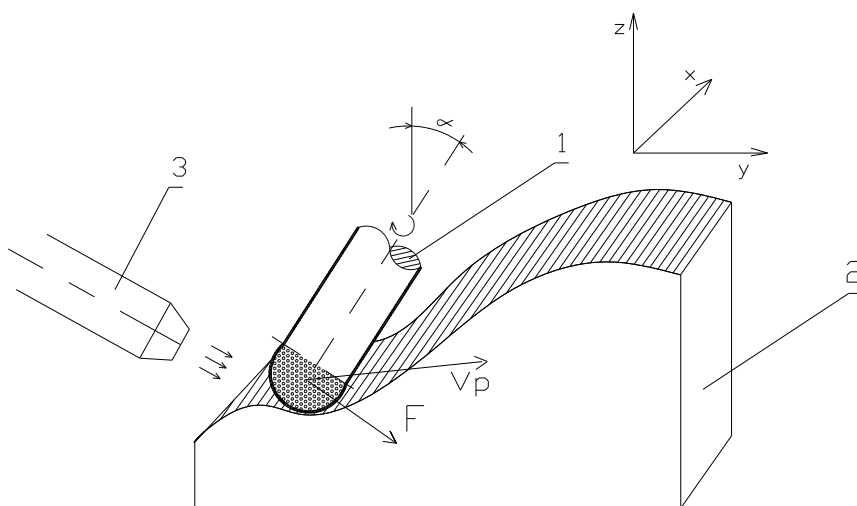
Scheme of machining area in electrochemical grinding process; v_p - grinder feed rate, ω - grinder rotational speed, PO - workpiece, ER - electrode tool (grinder), l - electrochemically dissolved layer.
